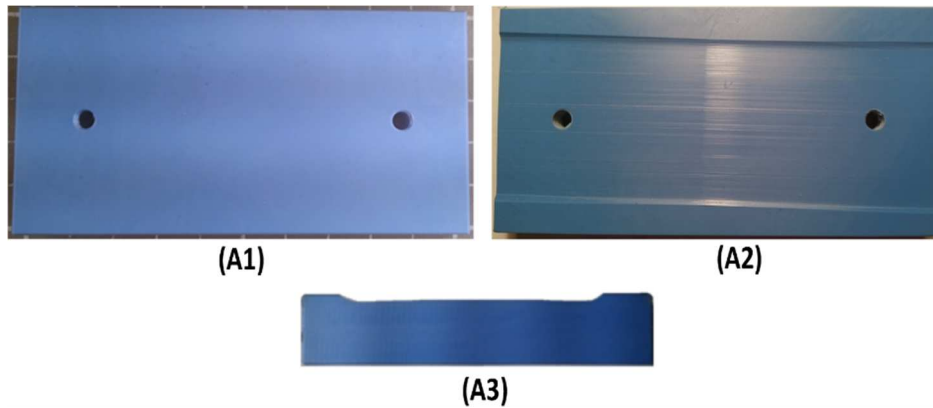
Type II. (A1) New Pad (A2) Pad B Surface Wear after 350km (A3) Side View of Pad B Surface Wear
